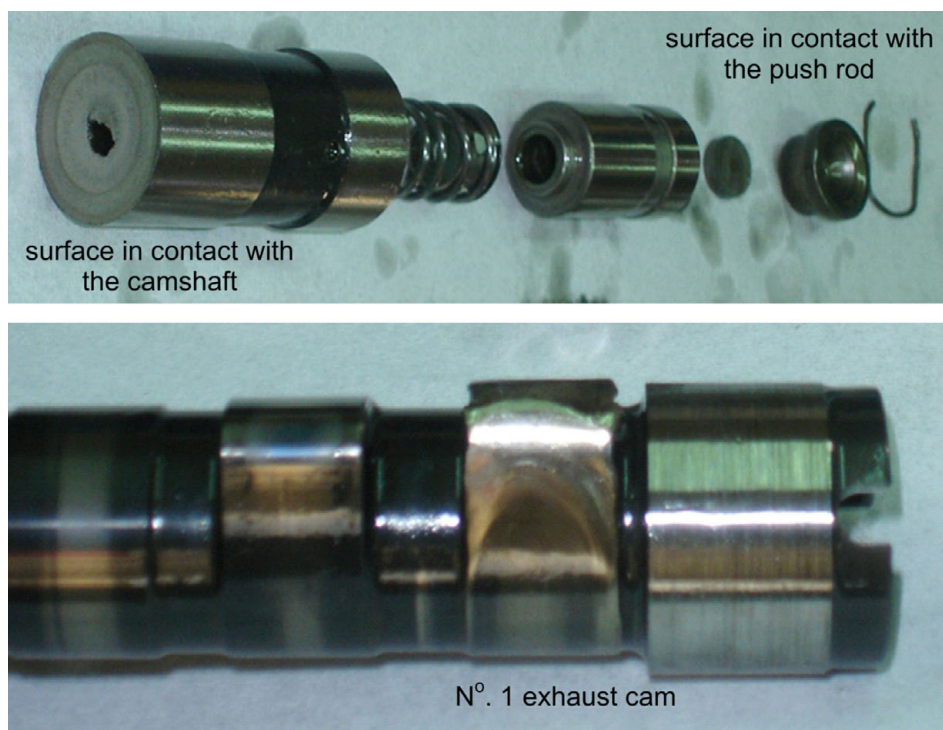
Hydraulic tappet and exhaust cam for the n° 1 cylinder
